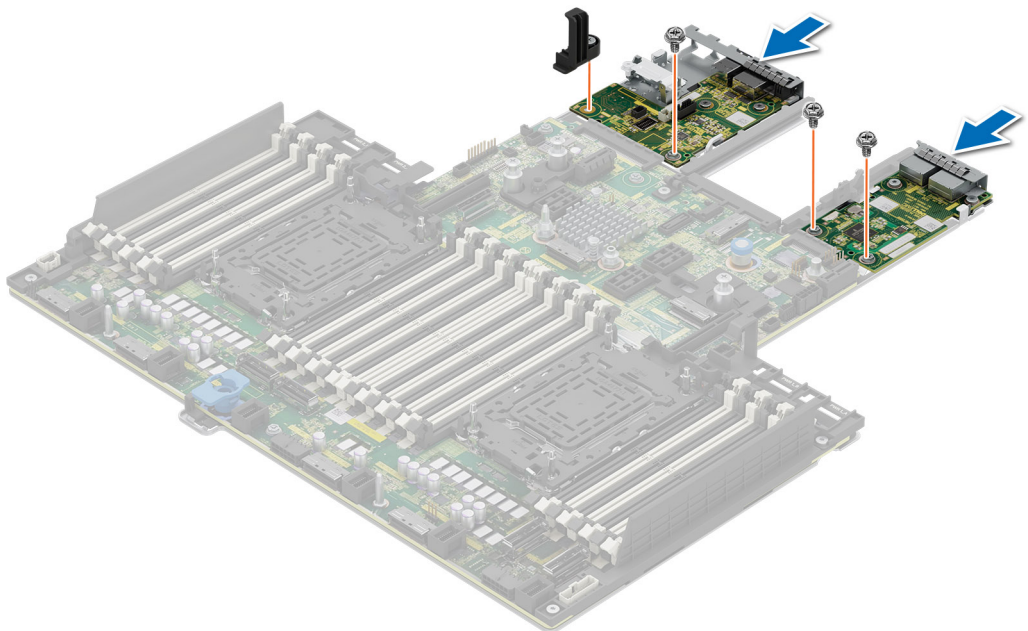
Installing the LOM card and Liquid cooling rear I/O board
